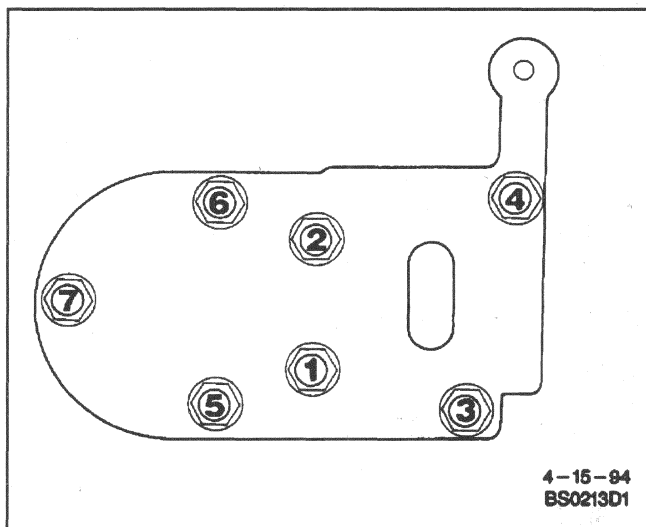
Automatic Level Control Air Compressor Head Bolt Tightening Sequence
